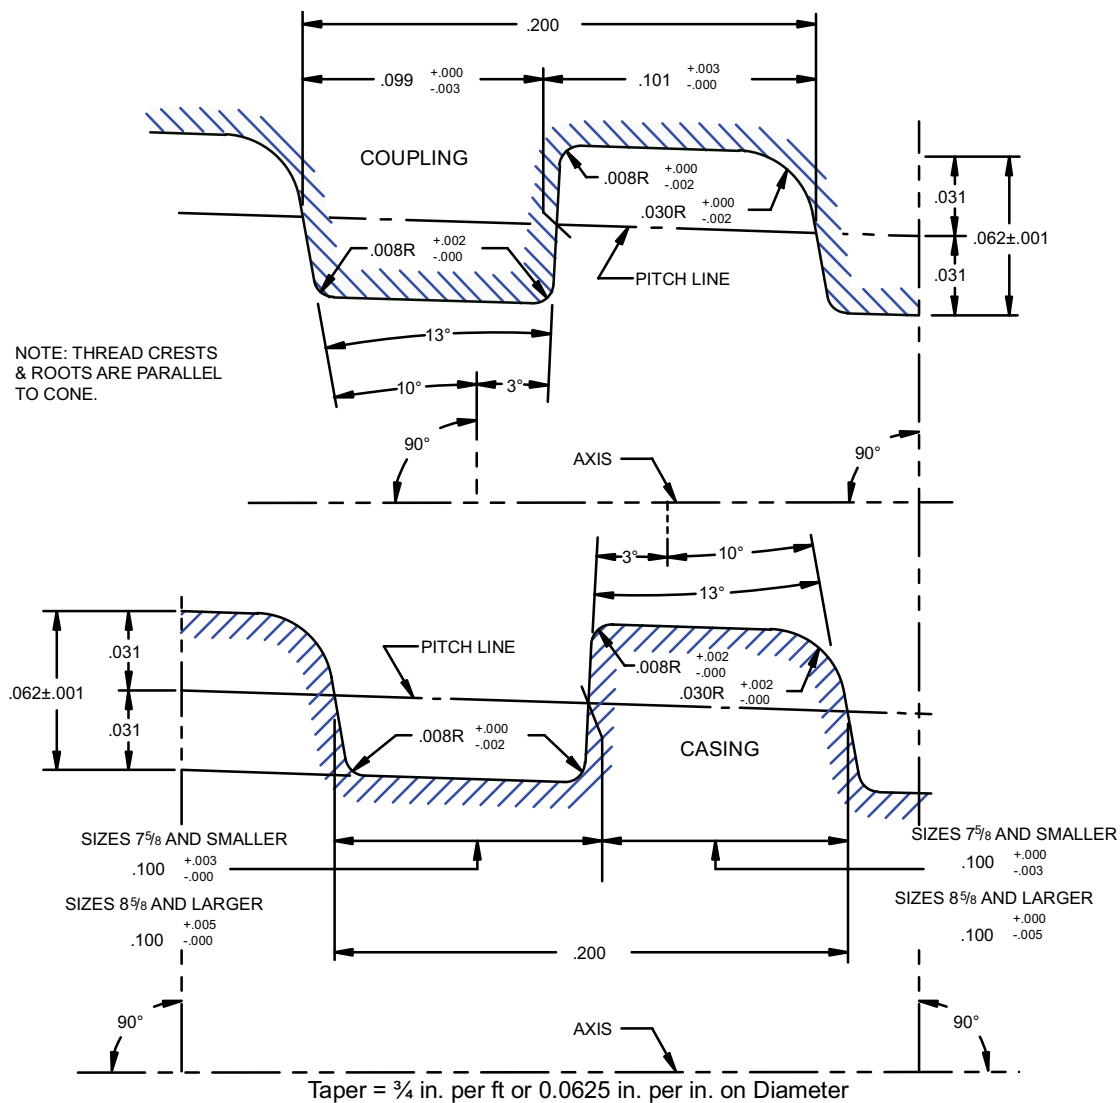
Buttress Casing Thread Form and Dimensions—for Casing Sizes 4 $\frac{1}{2}$ through 13 $\frac{3}{8}$
